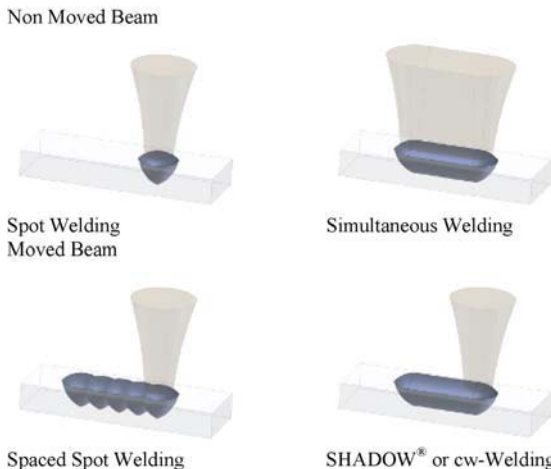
Classification of laser beam micro-welding.
